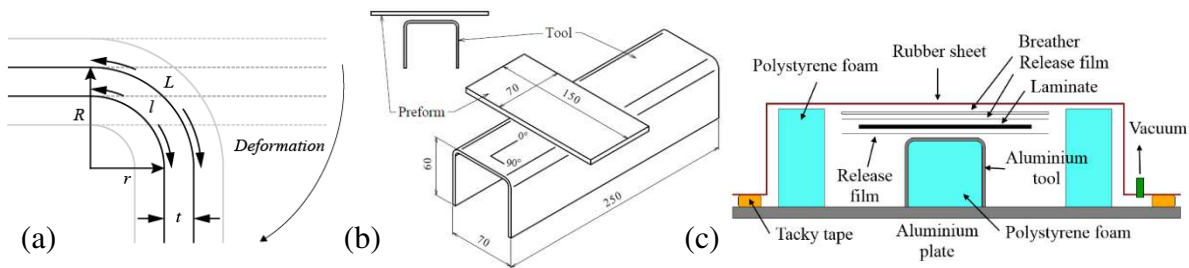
Drape forming test: (a) the length difference between each layer around the corner (b) the flat preform on the C-section aluminium tool (dimension in mm), (c) schematic of the draping test set up.
